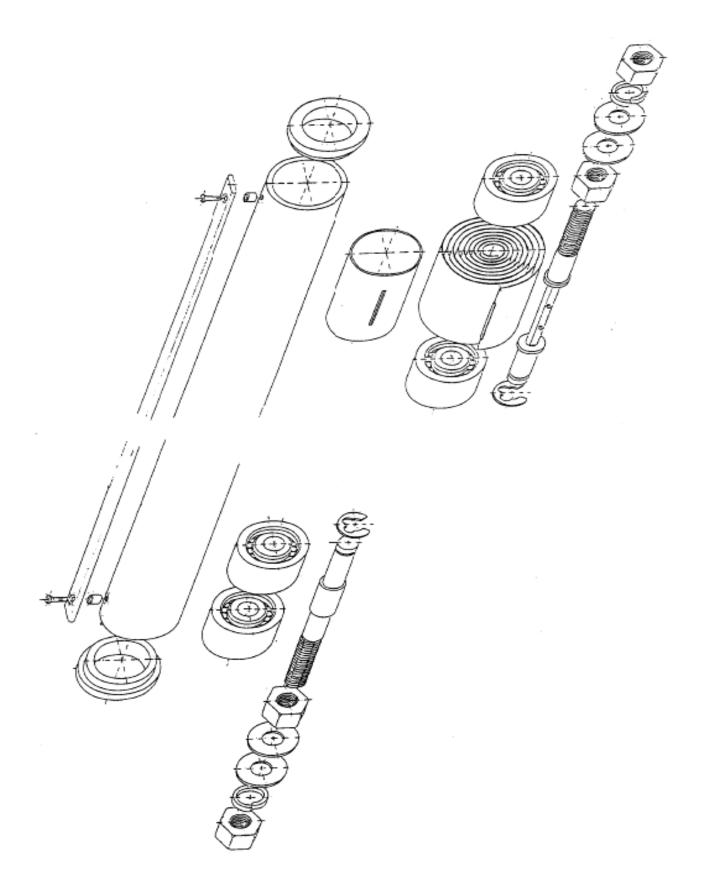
Construction of the pivoted tube with its spiral springs and ball-bearings.
